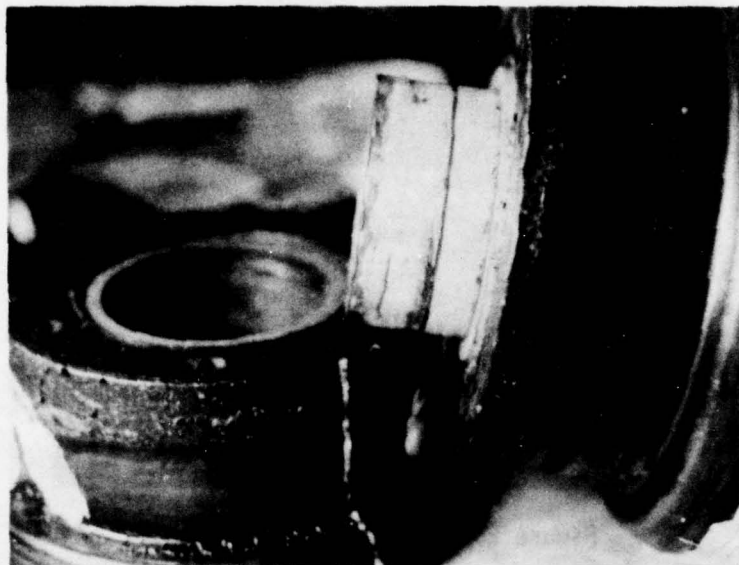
Disassembled Wheel After 260 Miles of Straight Roll
